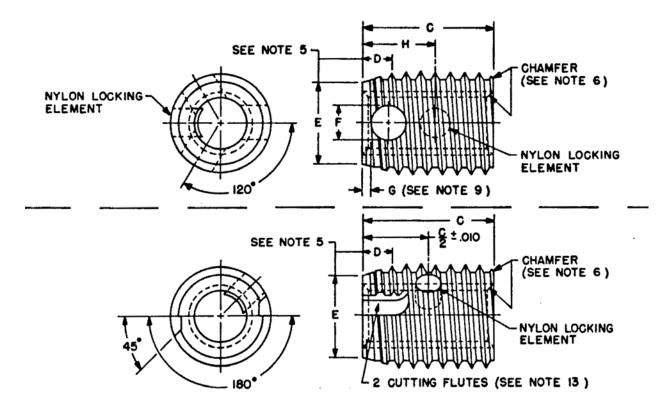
INSERT, SCREW, OPTIONAL DESIGNS.
